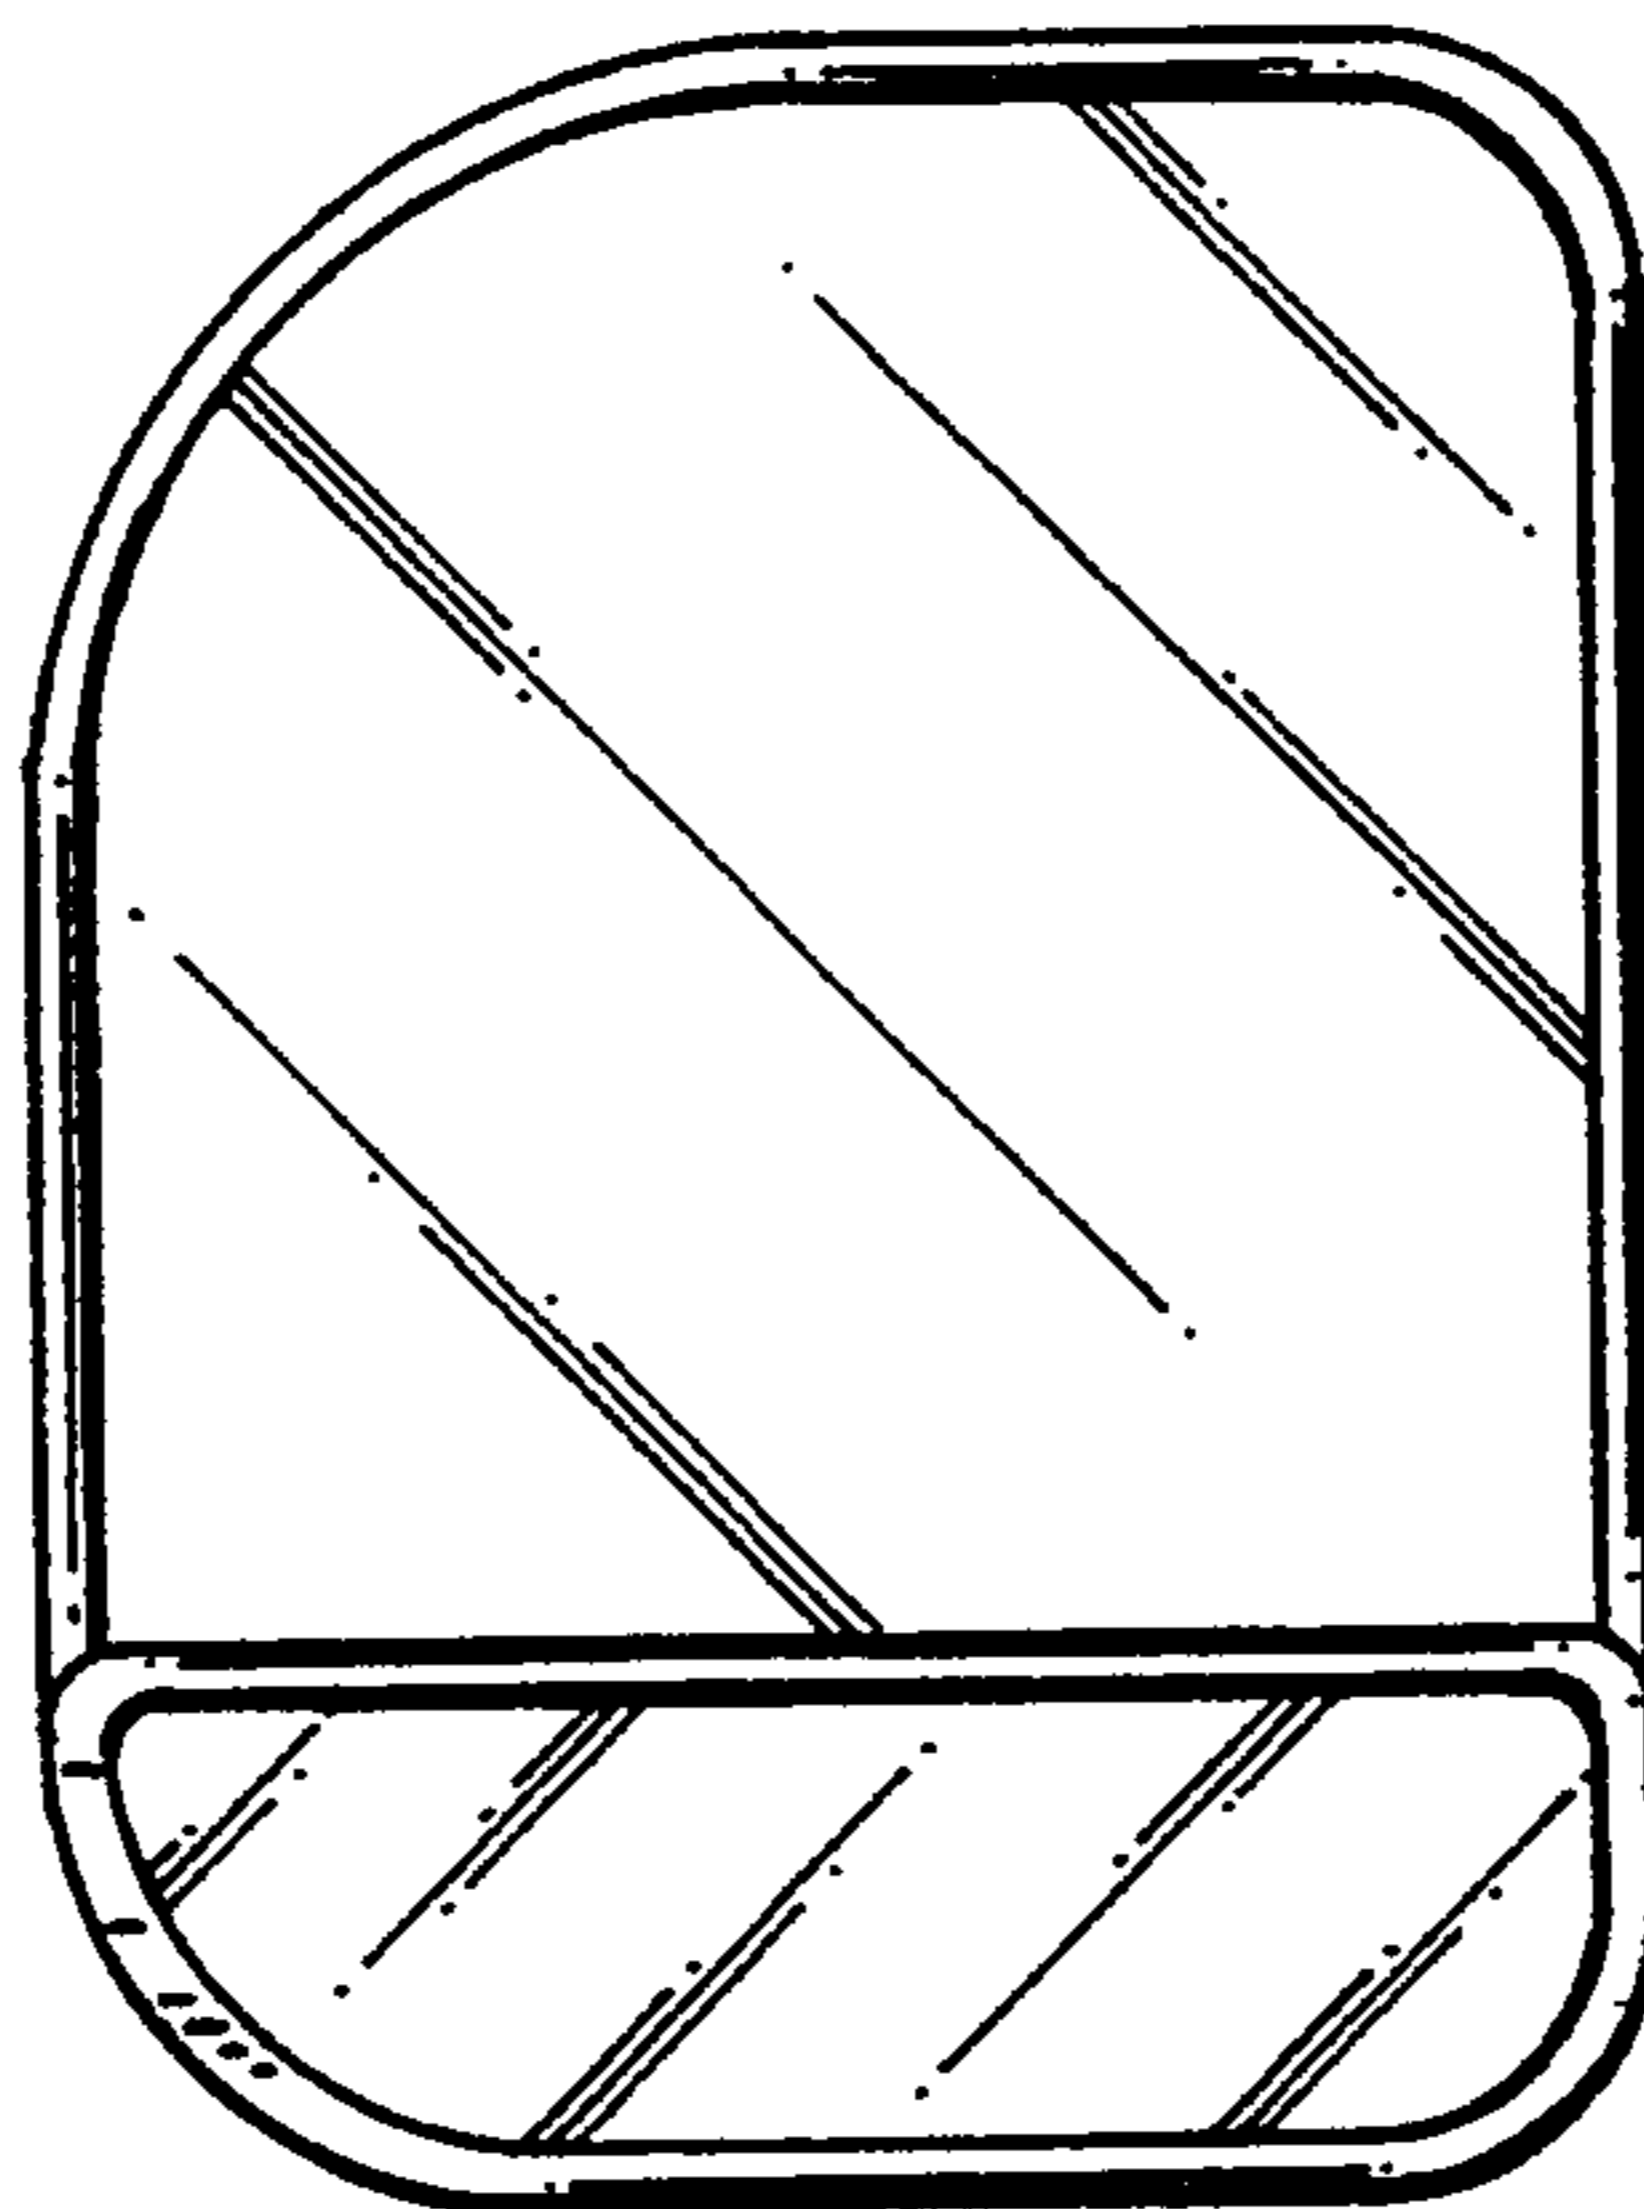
is a rear view of the second embodiment of a rear view mirror;
